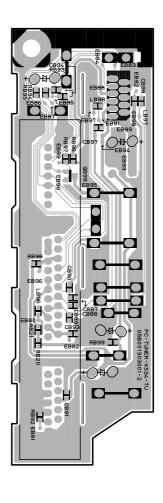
EU82 Tuner Unit PC Broad (Top side)
